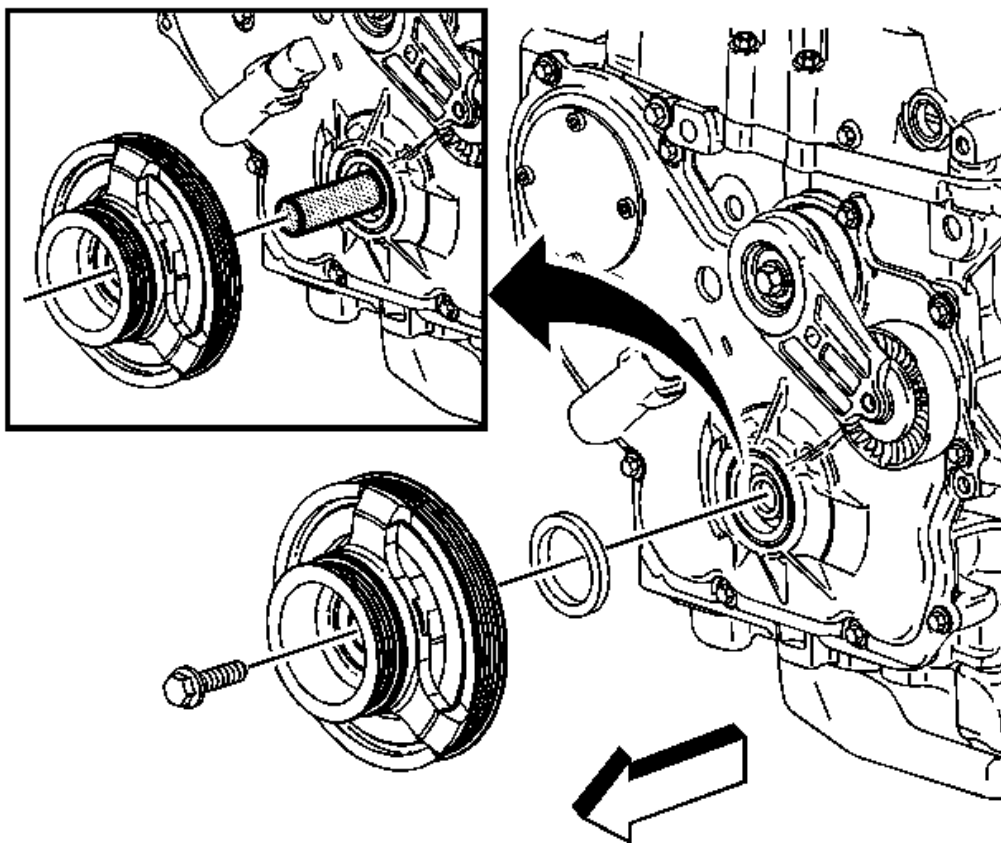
View Of Crankshaft Balancer, Bolt & Washer
